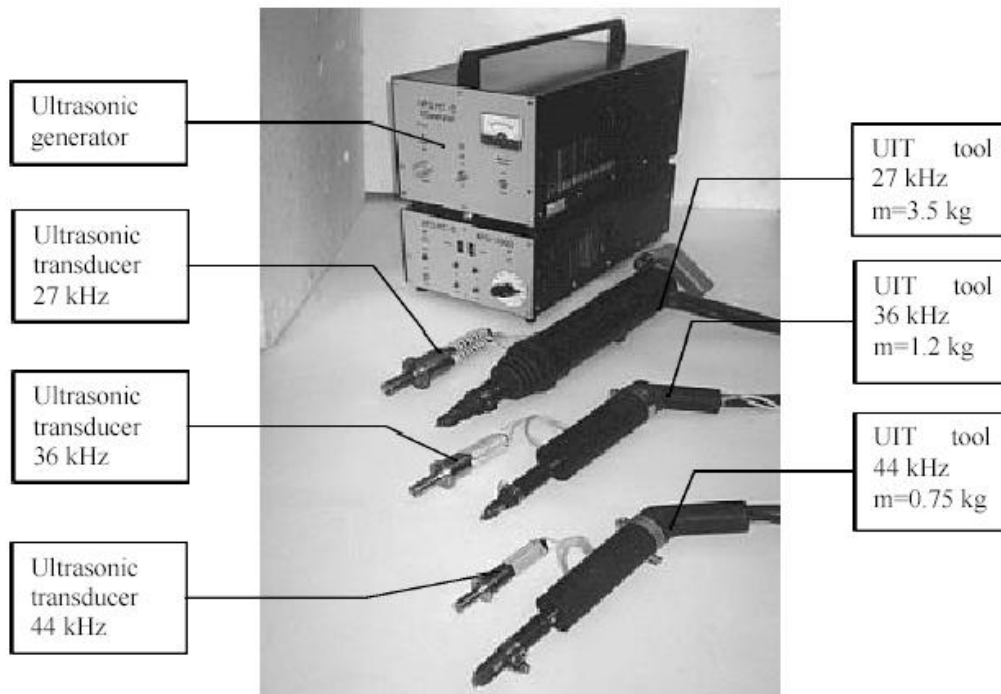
UIT Equipment, Including UIT Generator, Transducer, and Tool
